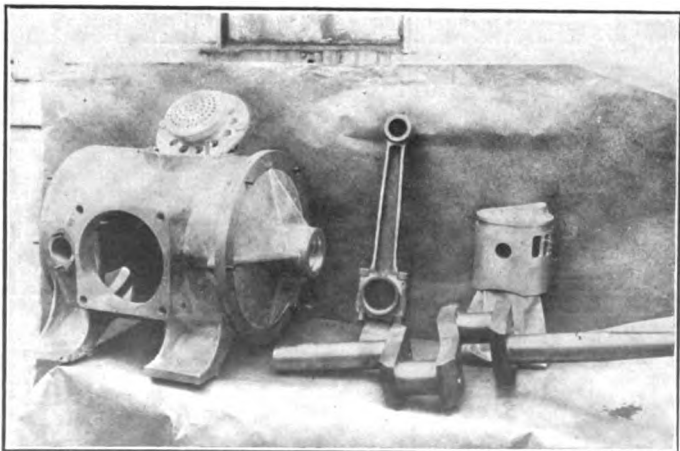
Component parts of Farcot motor showing the crankshaft, connecting rod and other parts
